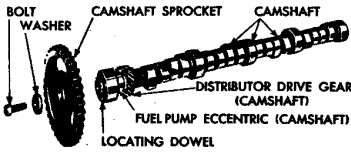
Typical camshaft with bearing lager than the lobes.
